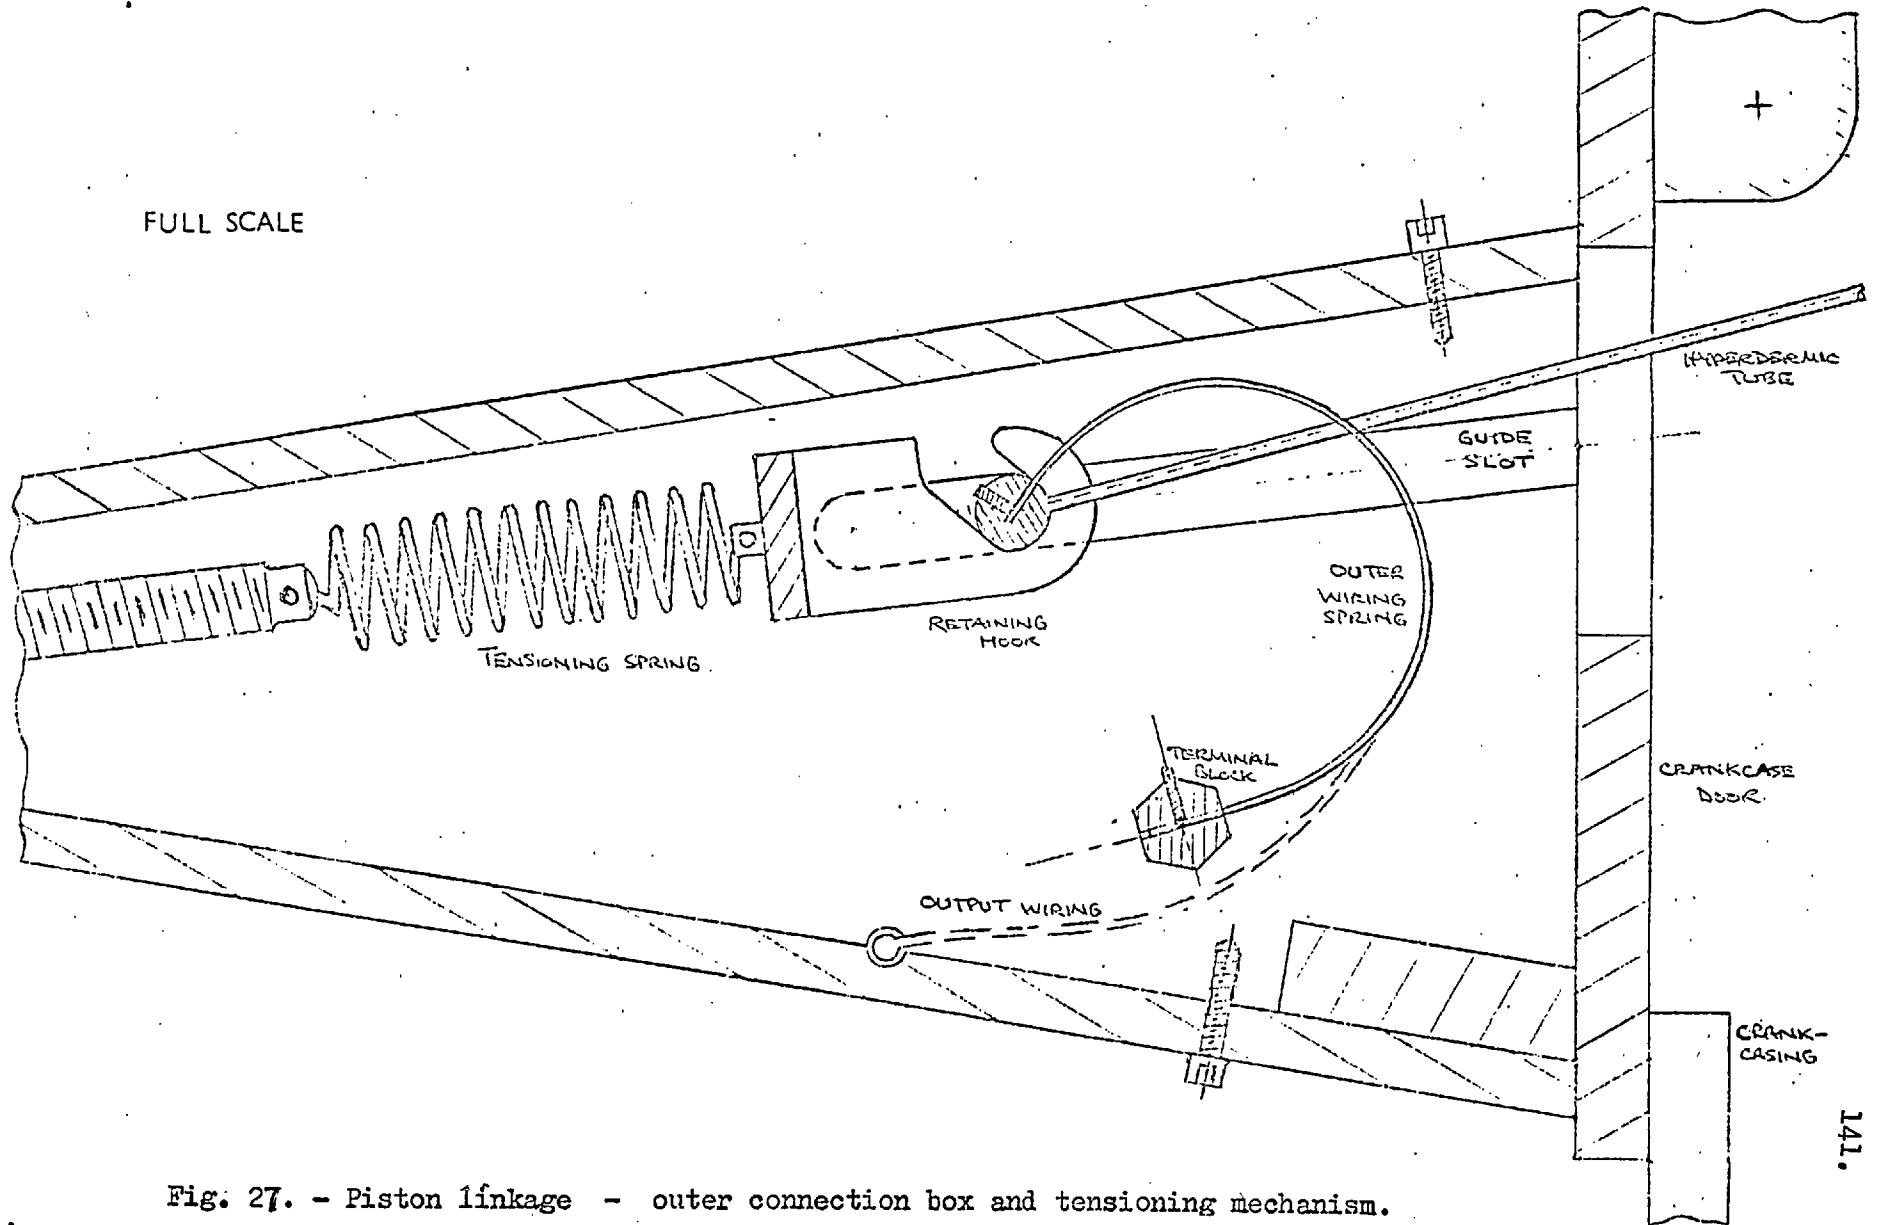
Piston linkage - outer connection box and tensioning mechanism.
